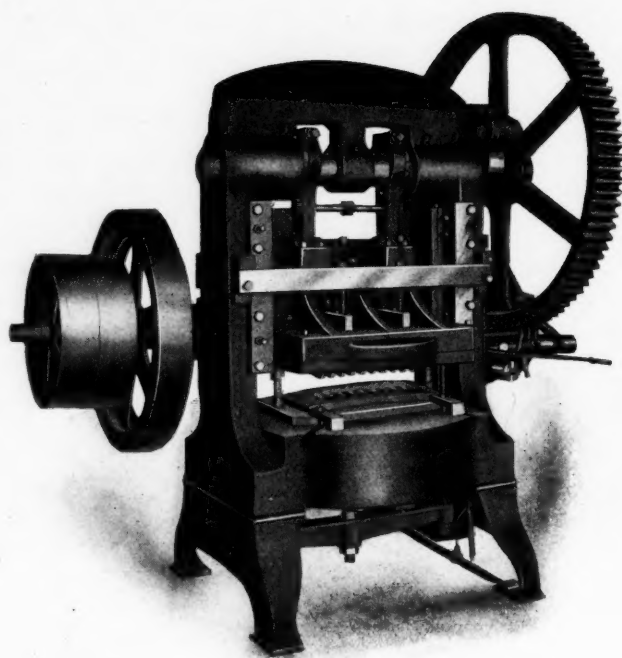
Automatic Disk-notching Press, Equipped with Positive Knock-out Devices for Punch and Die, and Automatic Friction Clutch.
